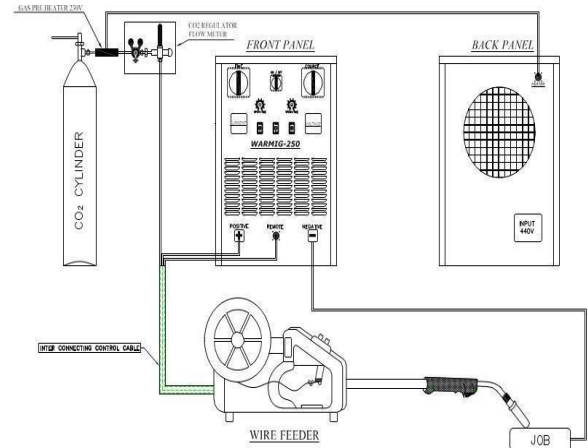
Gas Metal Arc Welding (GMAW or MIG)
